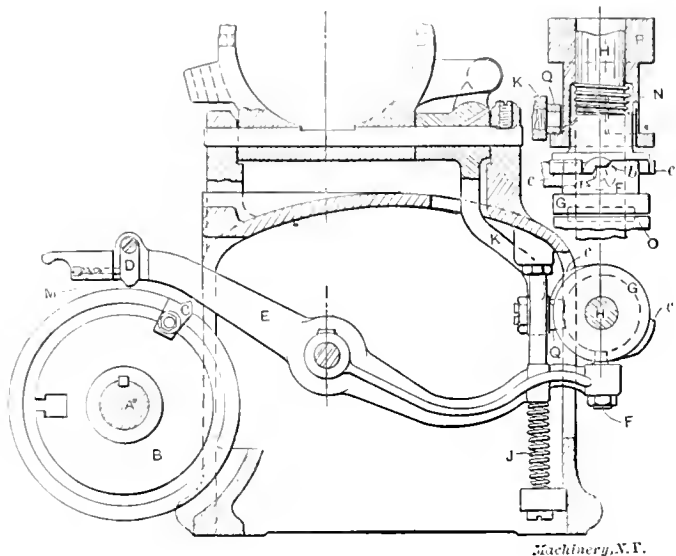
Cross-section through Bed, showing Reversing Mechanism.
